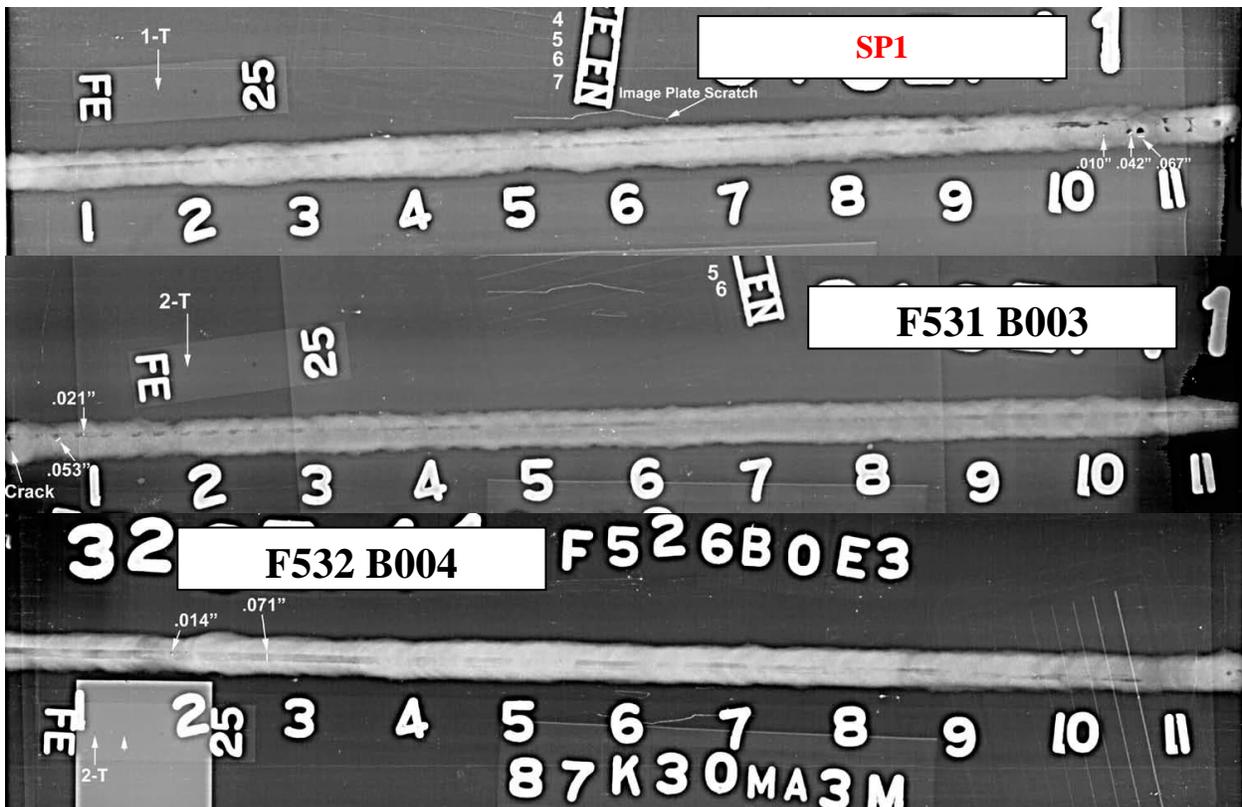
Radiography of the Baseline ER308LSi Welds
